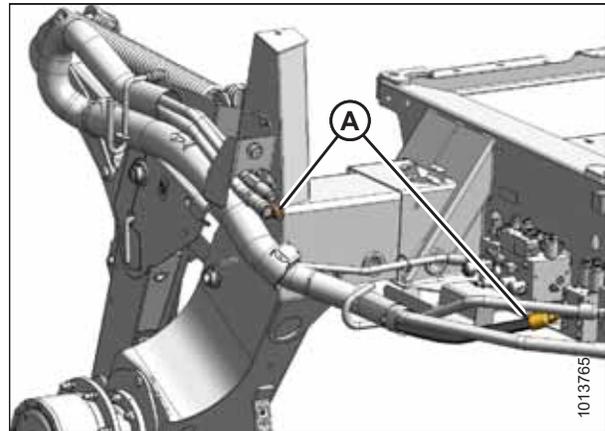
Auger Header Drive and Draper Header Reel Drive and Lift Plumbing Kit (MD #B4651)
